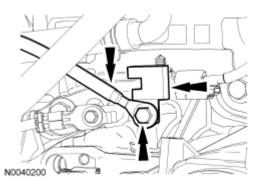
Locating Radio Frequency Interference Capacitor, Ground Wire And Bolt Courtesy of FORD MOTOR CO.
